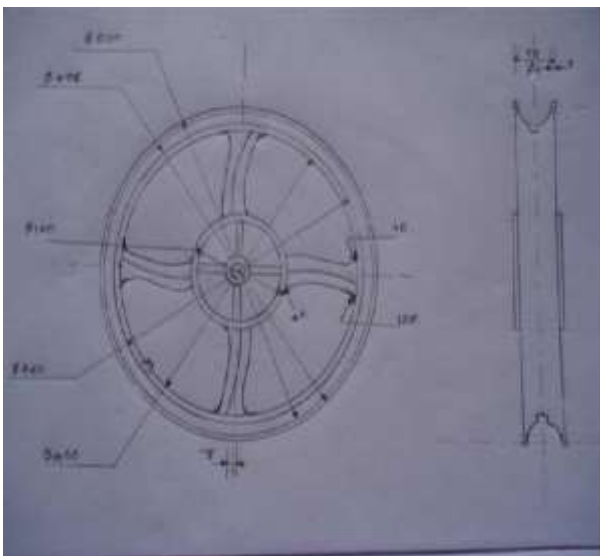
Specifications of the Alloy Wheel with Dimensions
